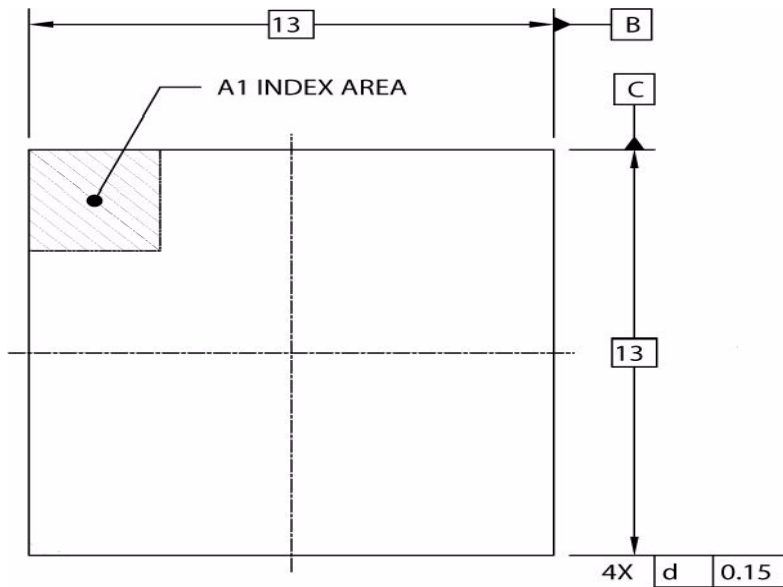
416 Pin MAPBGA 13 × 13 mm Package Top View
